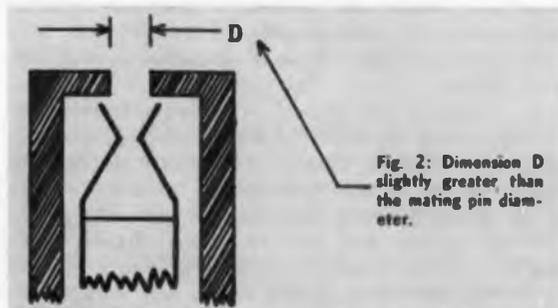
Dimension D slightly greater than the mating pin diameter.
